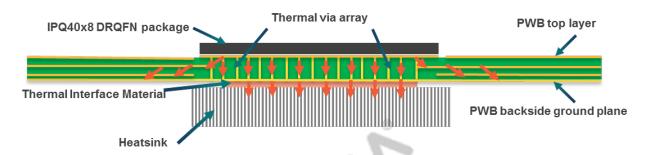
IPQ4018/IPQ4028 board cross-section view
